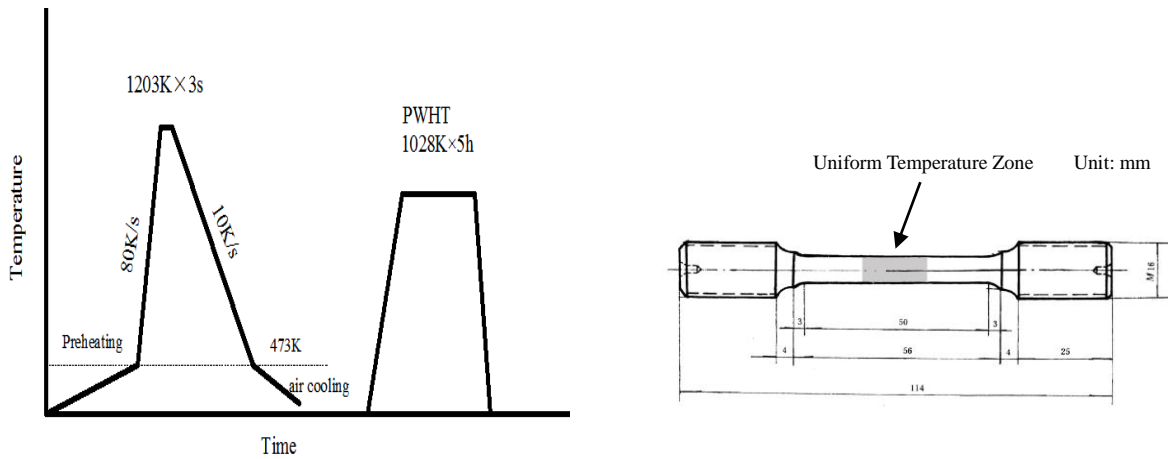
Preparation details of the specimens of FGHAZ simulated by a weld simulator. (a)welding thermal cycle simulation;(b)creep rupture test specimen
